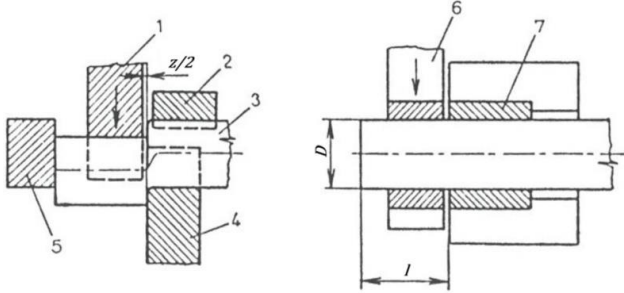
Volumetric cutting on conventional presses: left - cutting with open knives, right - cutting with closed knives: 1 - movable open knife, 2 - prismatic guide, 3 - cut bar, 4 - fixed open knife, 5 - folding stop, 6 - movable closed knife, 7 - fixed closed knife
